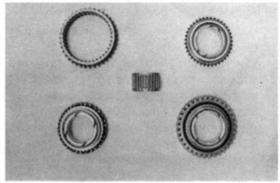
Gear and Needle Holler Bearing Inspection
